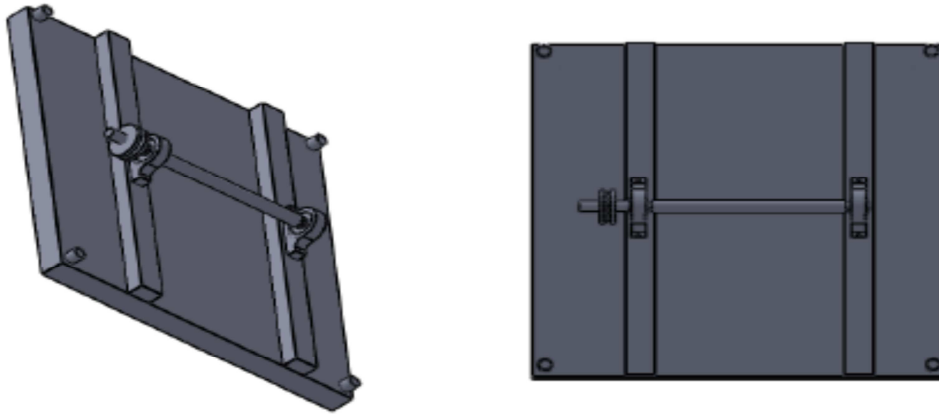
vibrating table, driver shaft, pulley and ball bearing with housing
